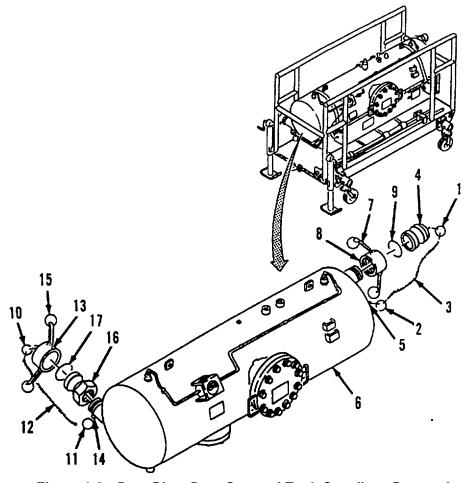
Dust Plug, Dust Cap and Tank Couplings Removal.
